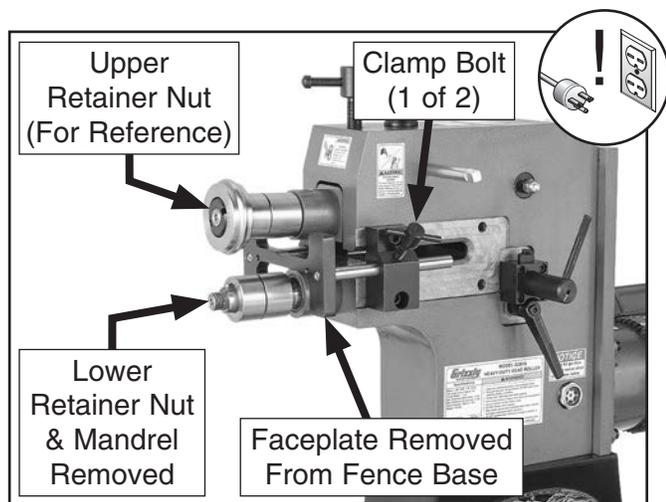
Location of clamp bolts; lower retainer nut, mandrel, and faceplate removed.
